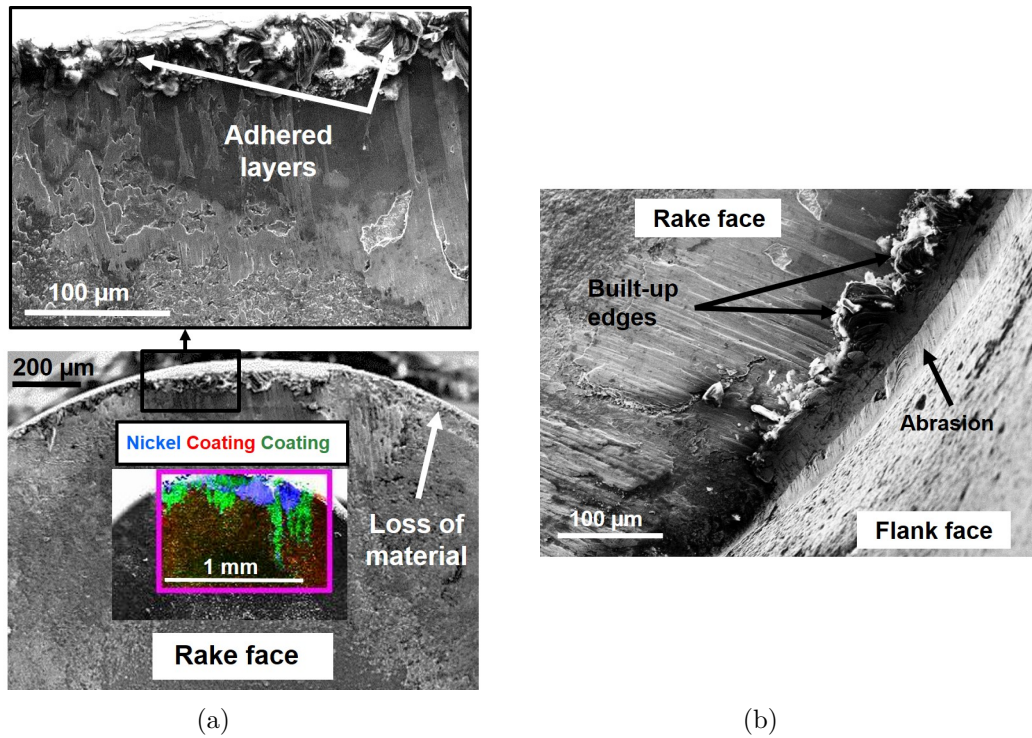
SEM observations of the tool wear after 15 min of machining in LCO₂ condition during Test 1: (a) Rake face/EDS analysis; (b) Flank face.
